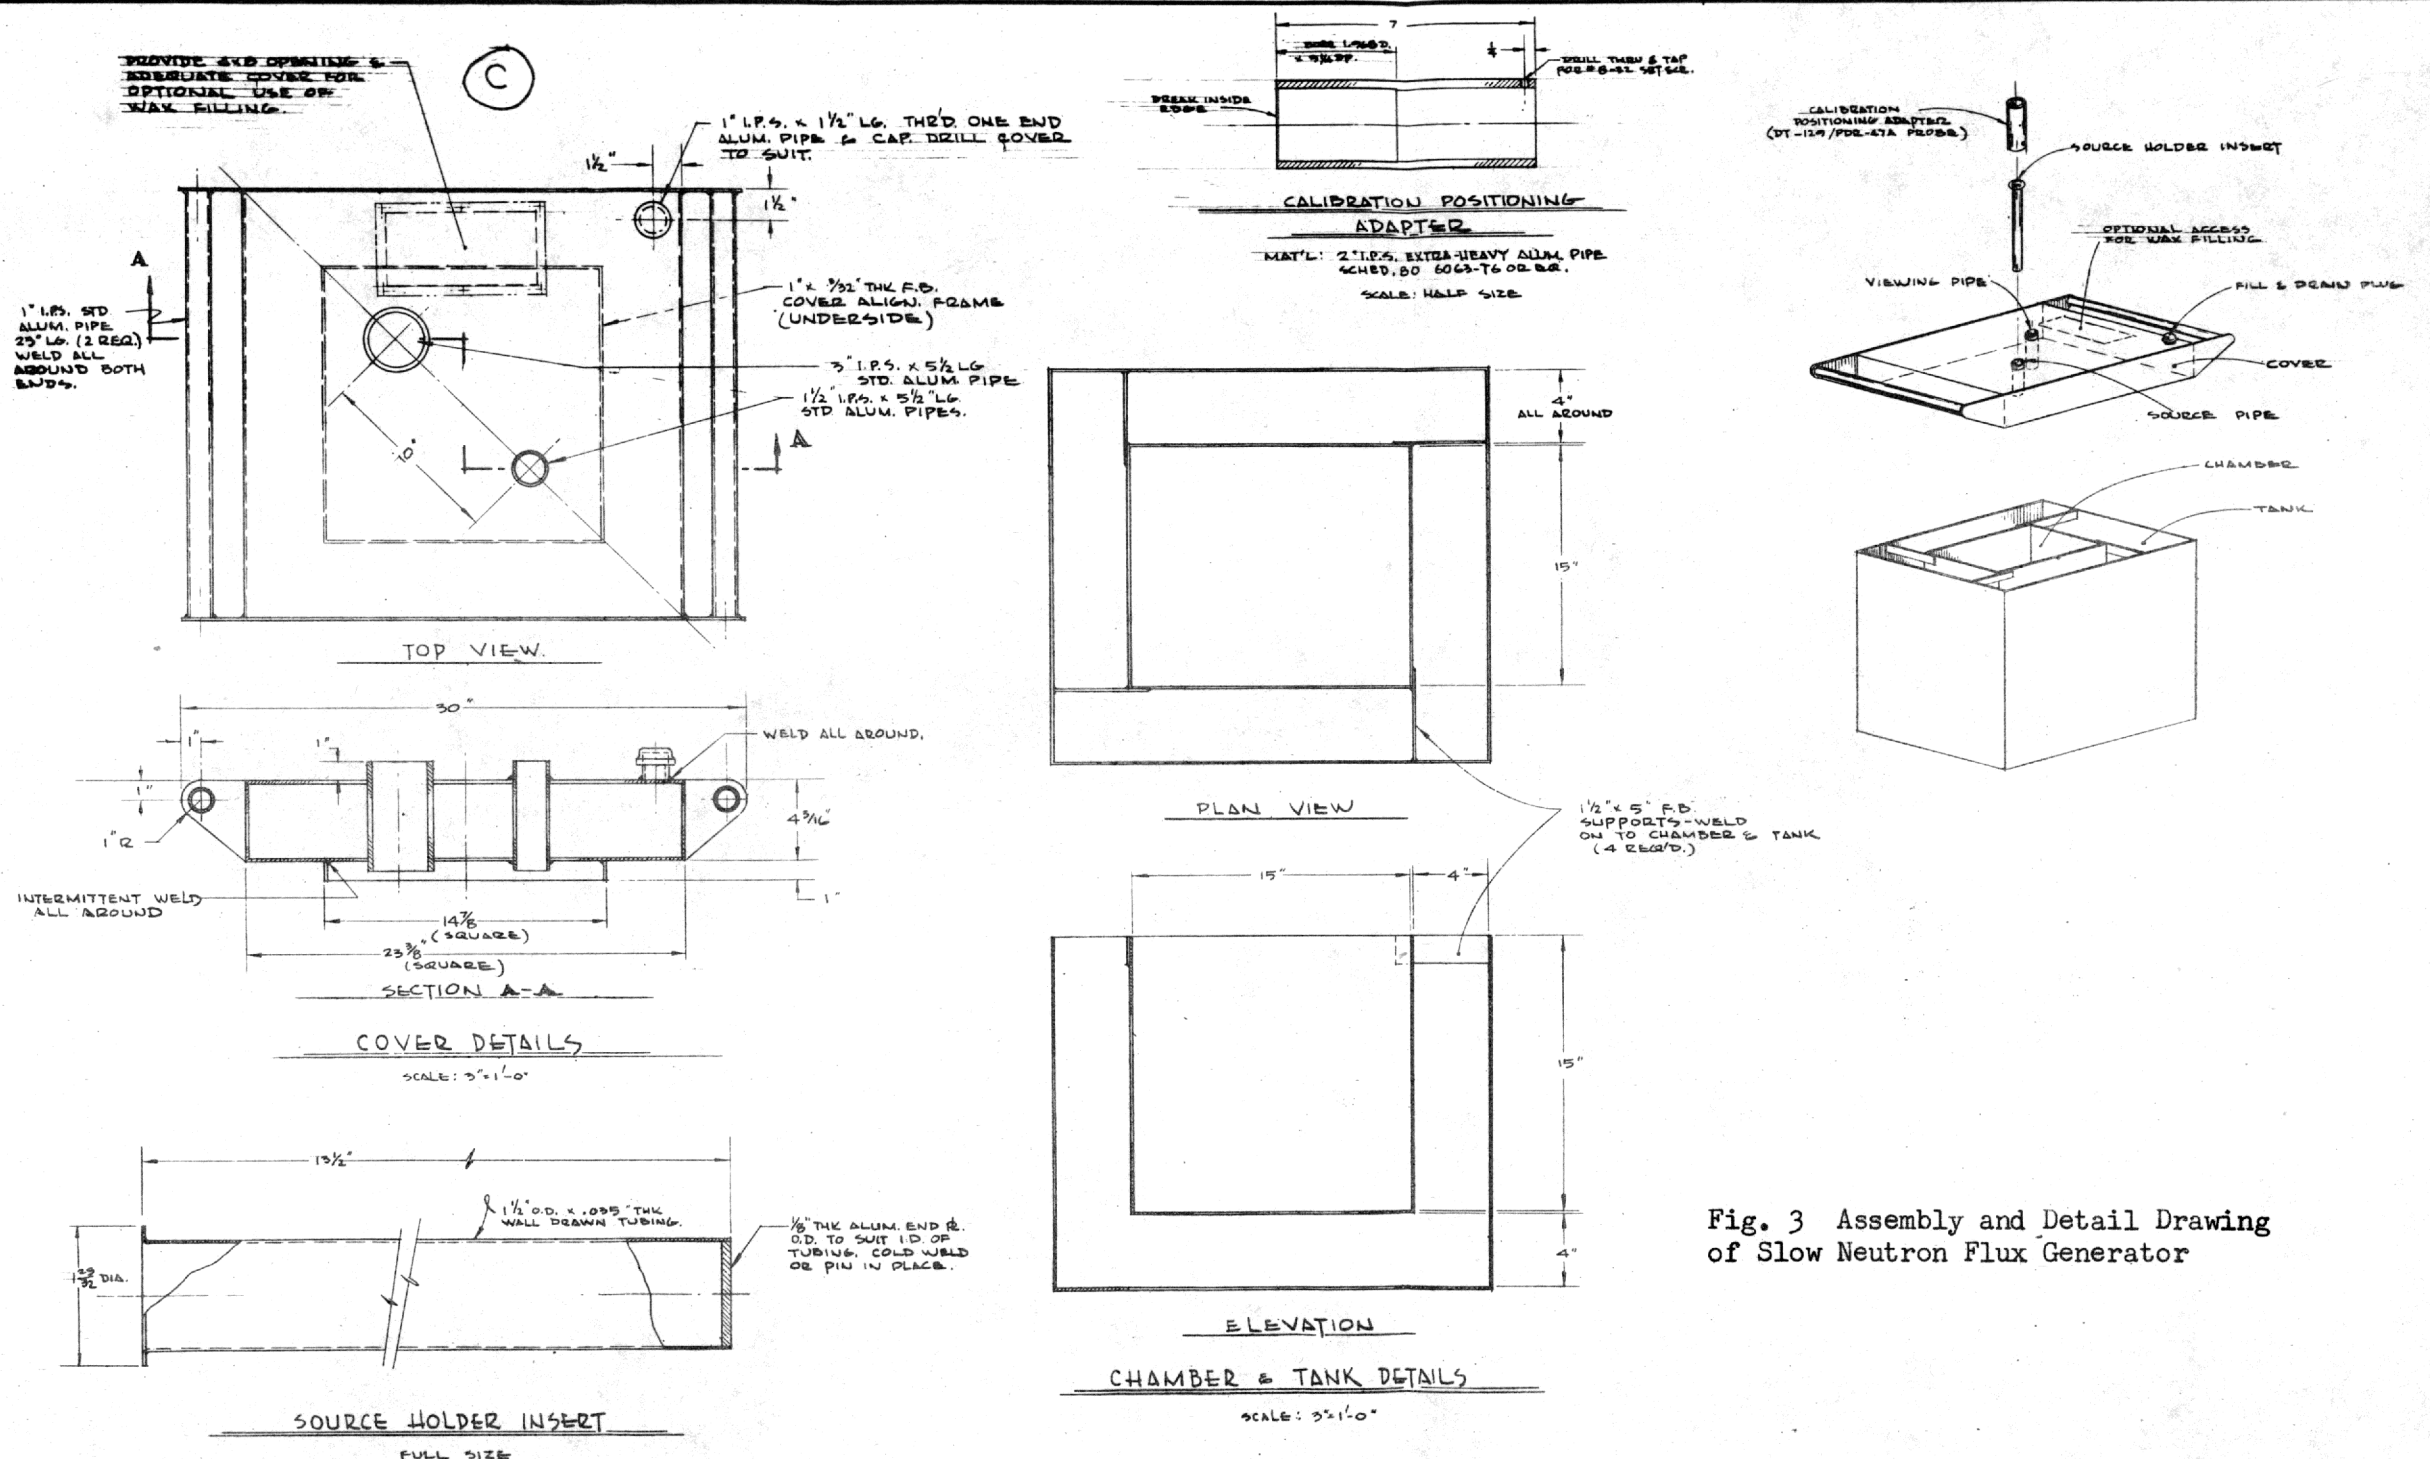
Assembly and Detail Drawing of Slow Neutron Flux Generator
